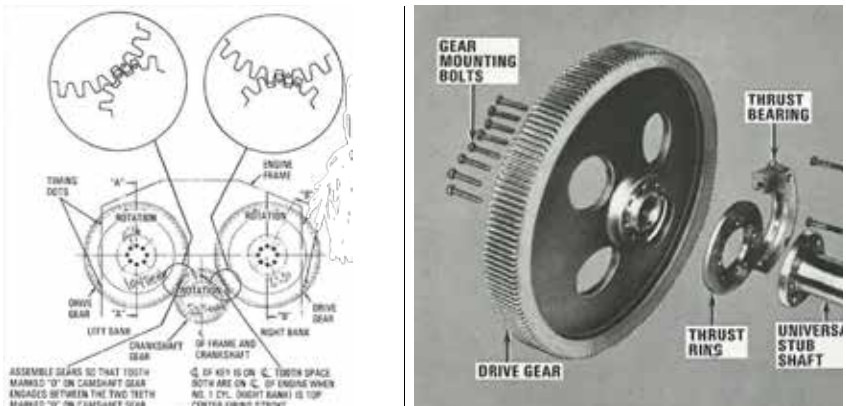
Cam Gear Timing Indicators and Cam Drive Gear Journal Assembly Images from GE Service Manual - Diesel Engine, Section 9, GEK-30150
